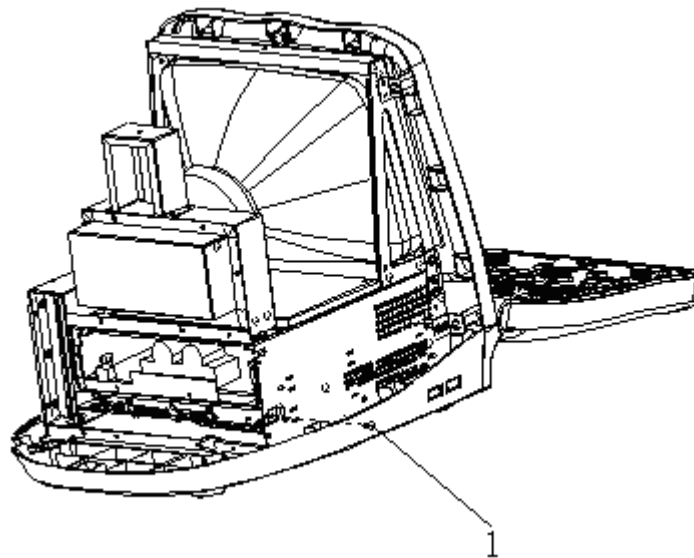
Sketch Map of Probe Board and Main Board Disassembly (2)
